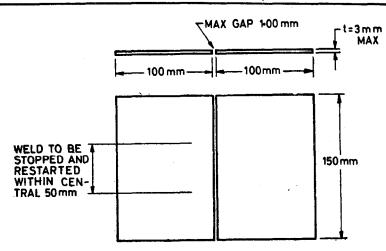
Test Piece for Butt Weld in Sheet
